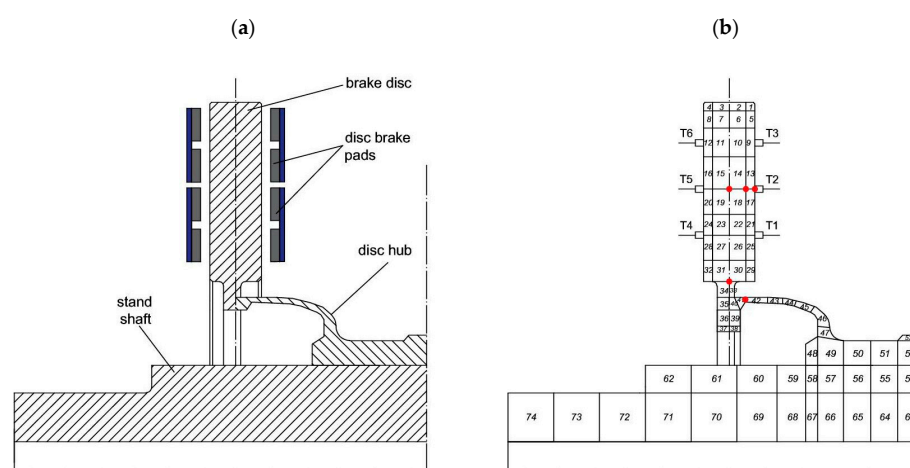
Axial section of a high-speed train brake disc installed on the test stand: (a) overview drawing, (b) adopted finite element mesh of the brake rotor including additional parts (disc hub, a part of test stand shaft) connected to the brake disc. The location of thermocouples (T_1, T_2, \dots, T_6) is also shown.
